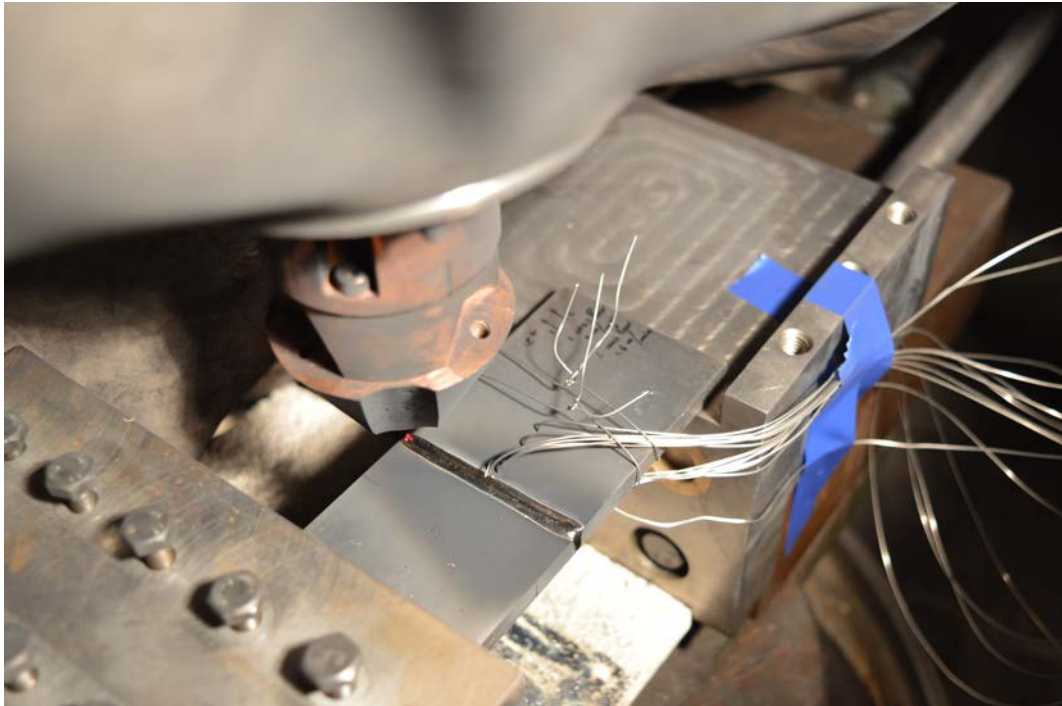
Photograph of a Ti-6Al-4V plate after welding
